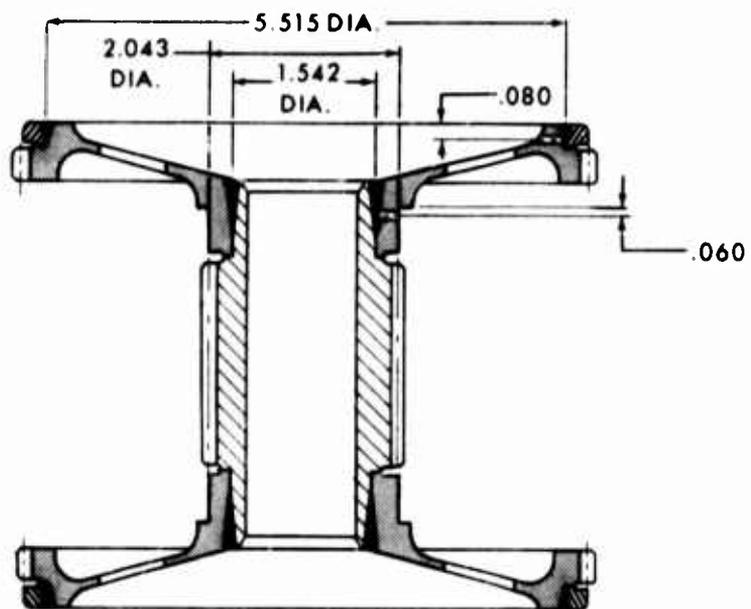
Calibration Standard, Diametral Weld.
